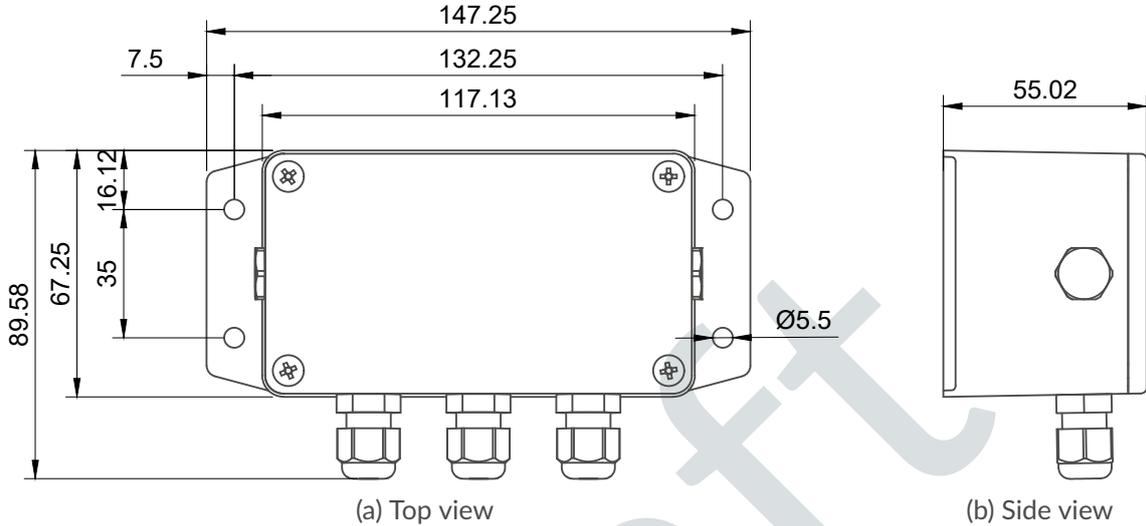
periSNOOP 4-20mA mechanical dimensions drawing.
